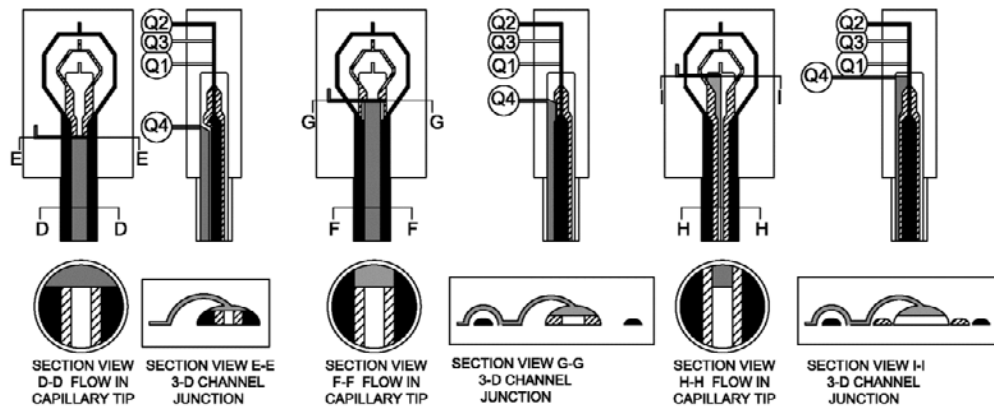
Front/right/section view of homogenous (left), layered (center) and axisymmetric (right) 3-dimensional SMMB deposition head channel concepts to assemble multiple materials in 2-dimensional array.
